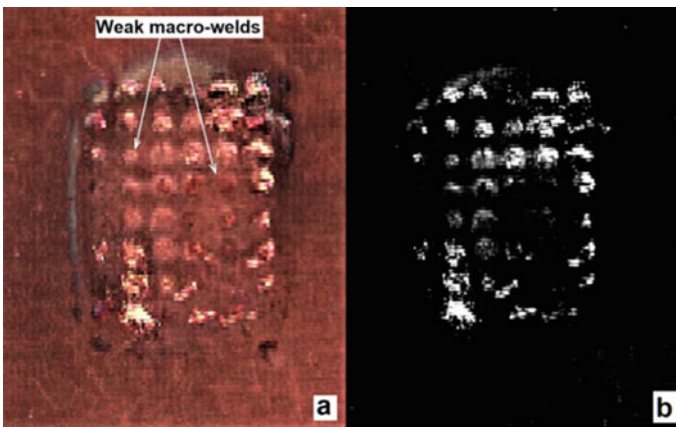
a) Weld interface showing weak bonds, b) ImageJ threshold view of the bonds
